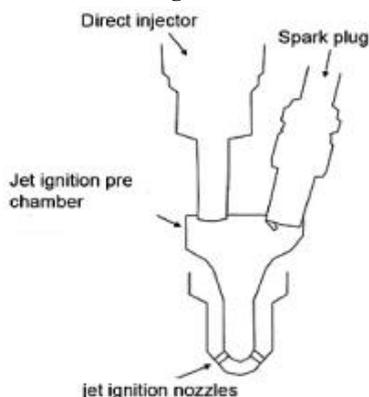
Jet ignition device assembly for the four valve direct injection jet ignition engine with spark plug⁵⁻⁵⁾
